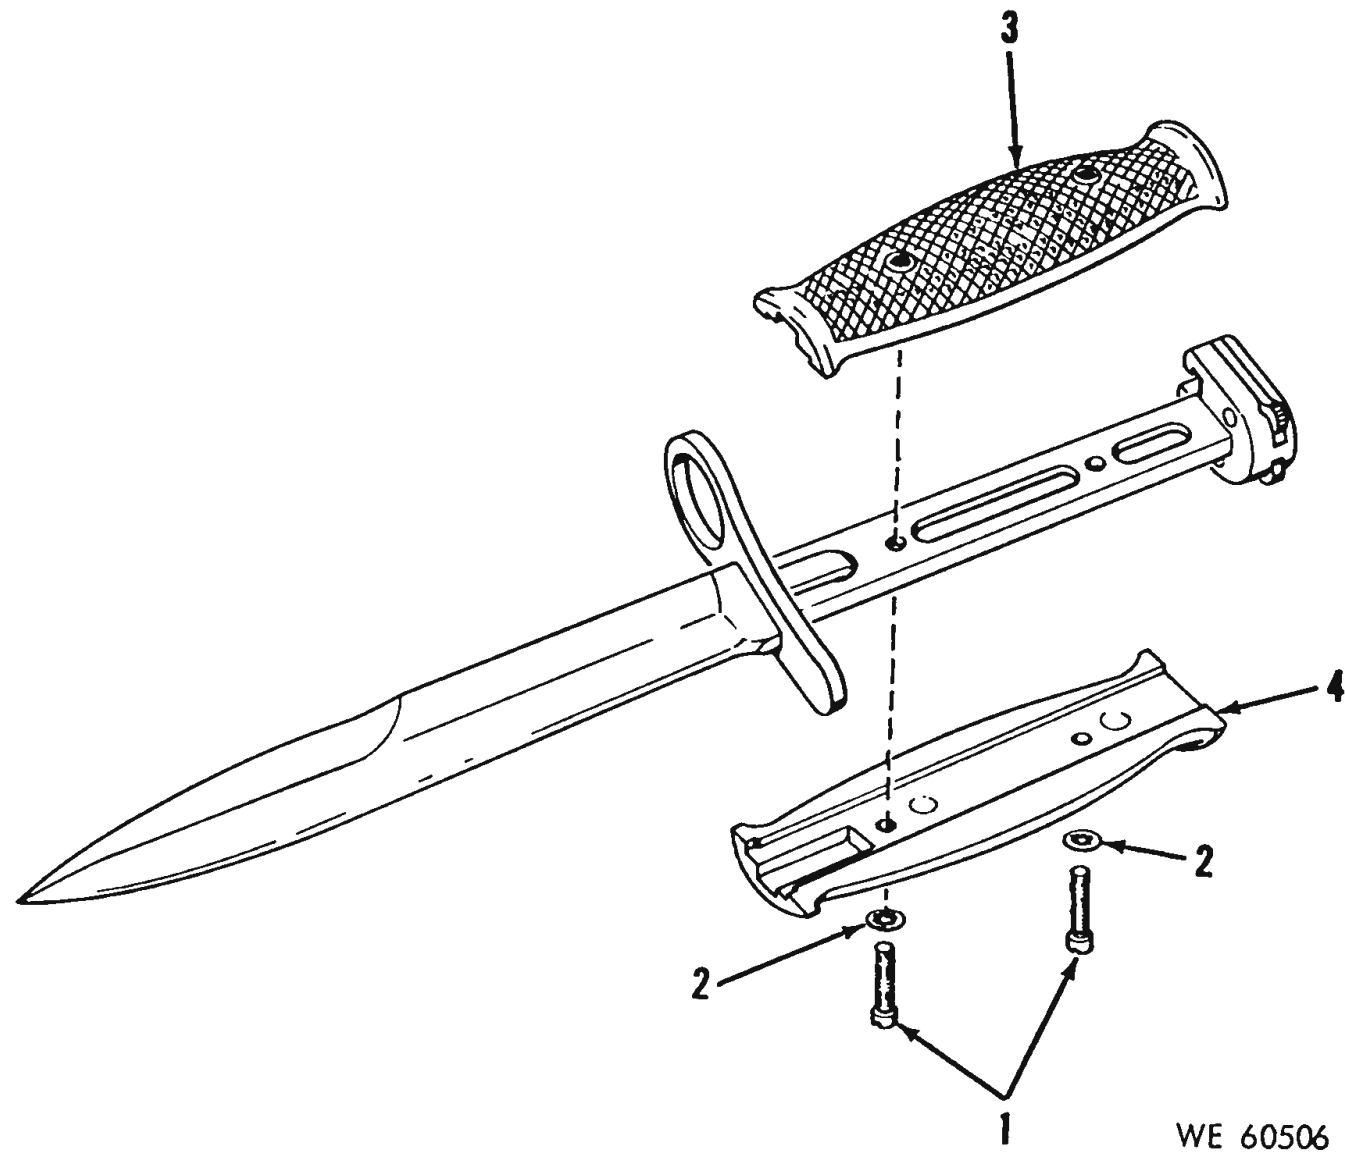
Bayonet-Knife M7—partial exploded view.
